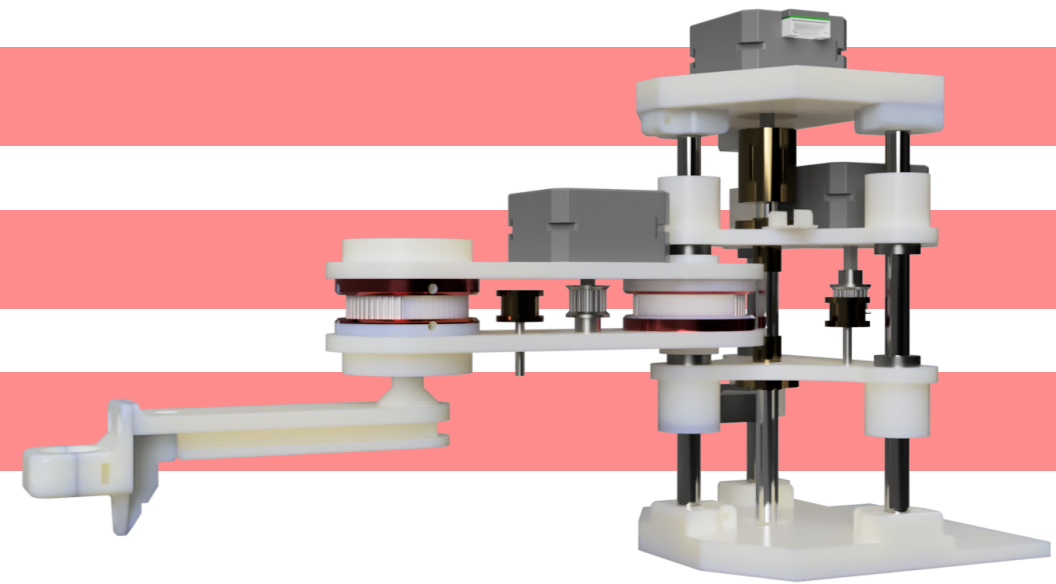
The final proposed design for the SCARA 3D printer mechanism.
